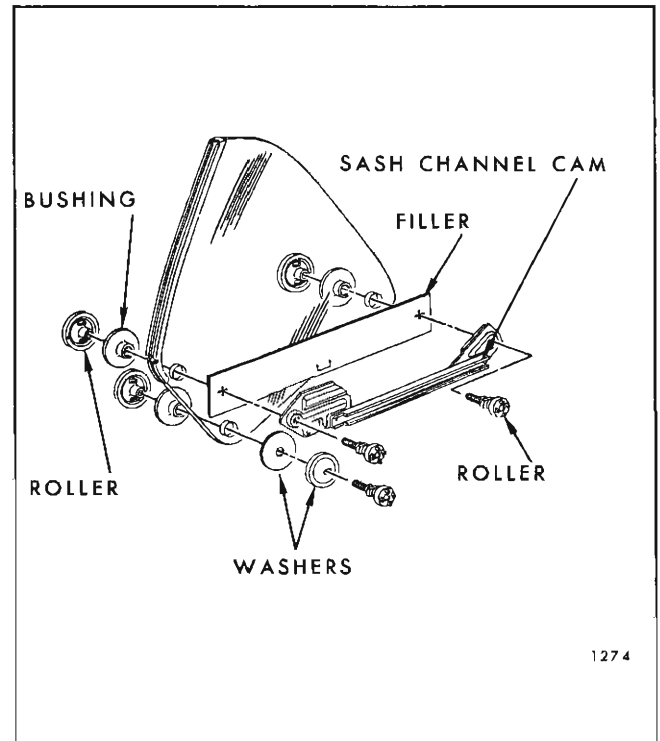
E11—"67" Style Rear Quarter Window Assembly
